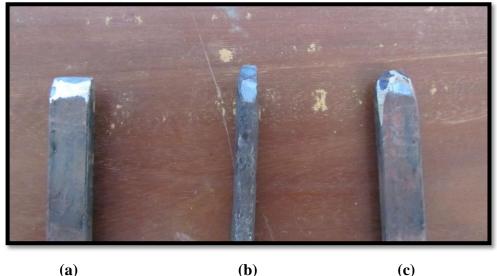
Different shape of blades used for testing (a. bevel edged b. pointed edged c. round edged)
